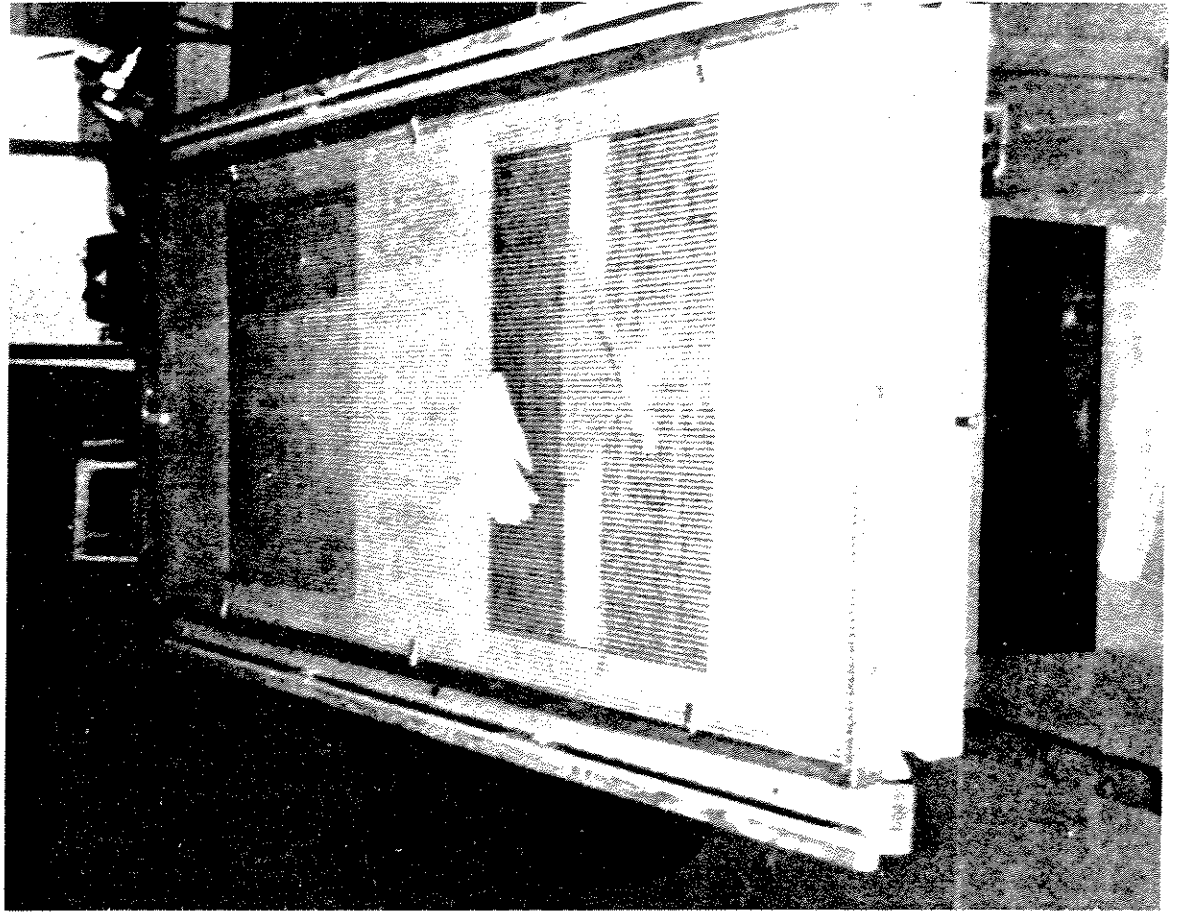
One of four jigs used for assembly of panel-frame corners.
